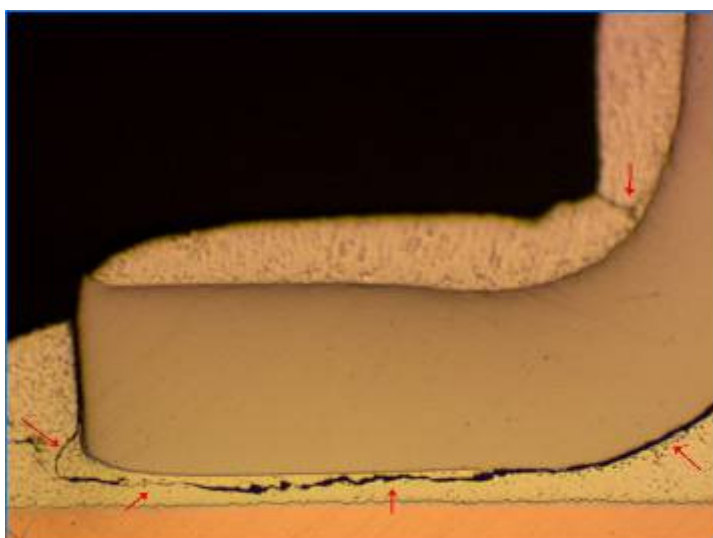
cross section, SN79, U12, left lead solder crack, 200xa
